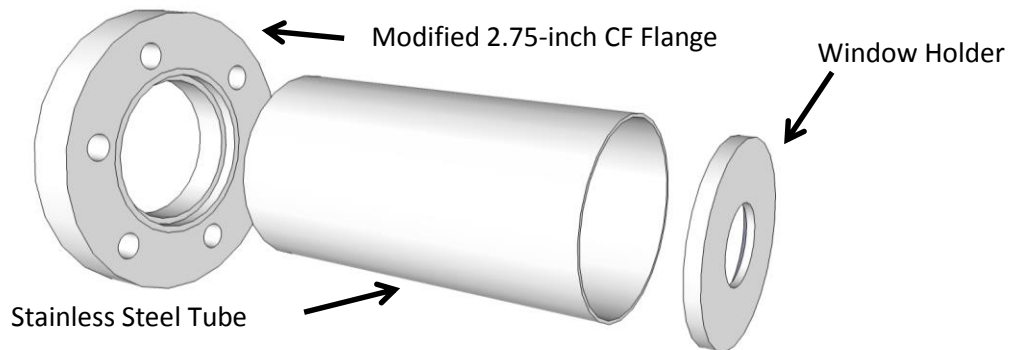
The vacuum finger design schematic with a modified bored out 2.75-inch CF flange, 1-inch diameter stainless steel tube, and vacuum sealable window holder.
